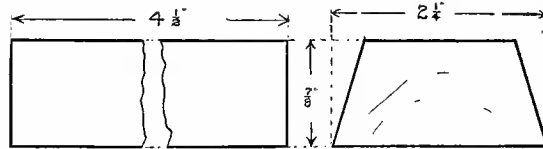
Mechanical Drawing of Sand-Paper Block
